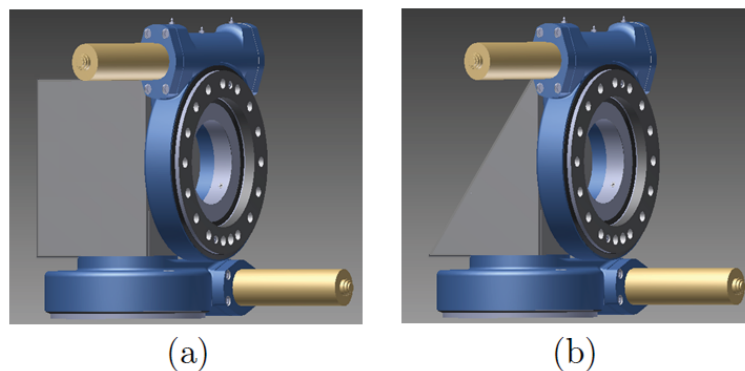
CAD drawings of the proposed perpendicular dual-axis slew drive connecting box assembly in (a) rectangular and (b) triangular configuration.
